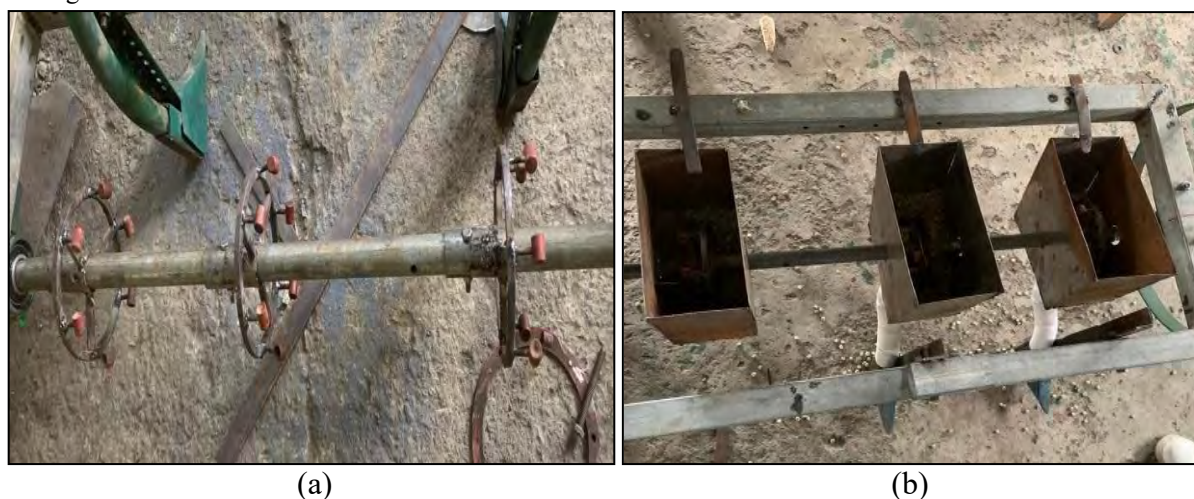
Fabricated views of seed discs (a) & hopper (b)
